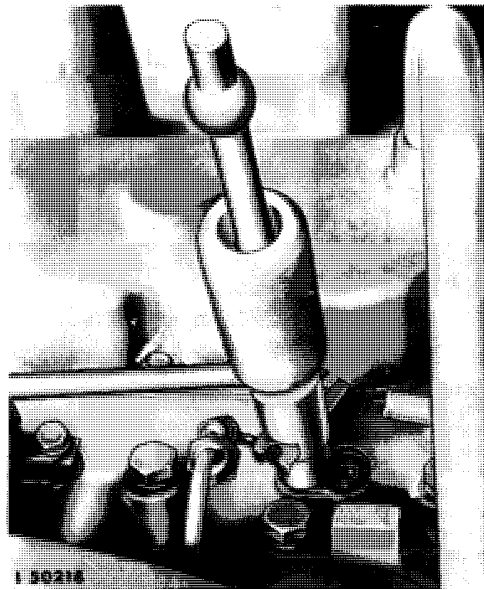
Removal of Injection Nozzle with Special Puller No. JDE 38
